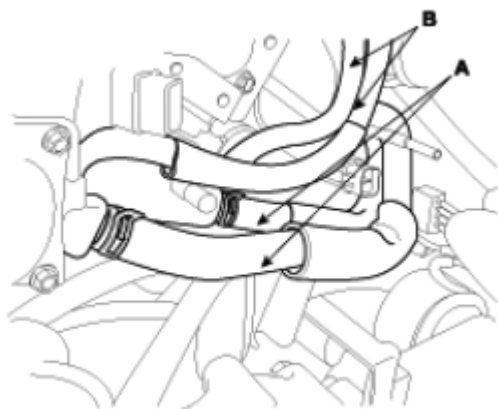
Identifying Heater Hoses And Throttle Body Heater Hose
